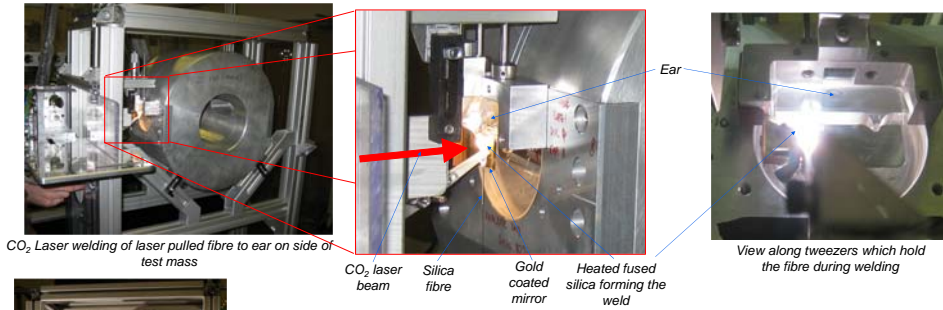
Aspects of mock monolithic test hang including attachment ears, fused silica fibres and CO₂ laser welding
